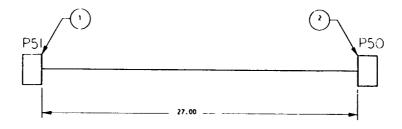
Tactical Relay Assembly to Special Relay Assembly Wiring Harness, Drawing No. 72-2224
